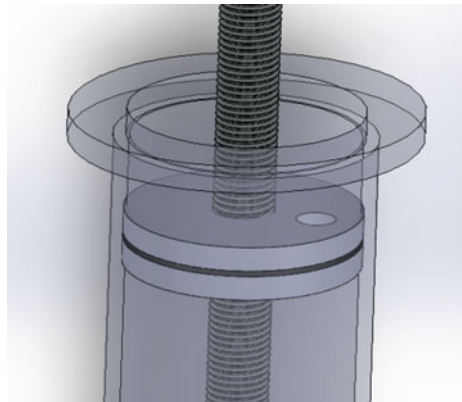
shows the inside view of the screw-based extruder showing how the fluid holder, piston, and the screw spindle are arranged. Figure 4 shows the detailed view of the piston. The rubber ring and the inlet hole are visible in the figure.
